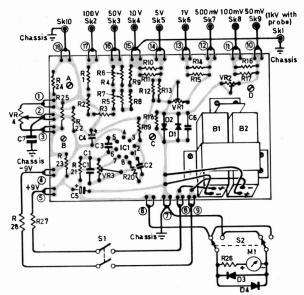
Printed circuit board viewed from the components side—printed wiring on rear. A-D are the bolts for fixing the board to the front panel.
